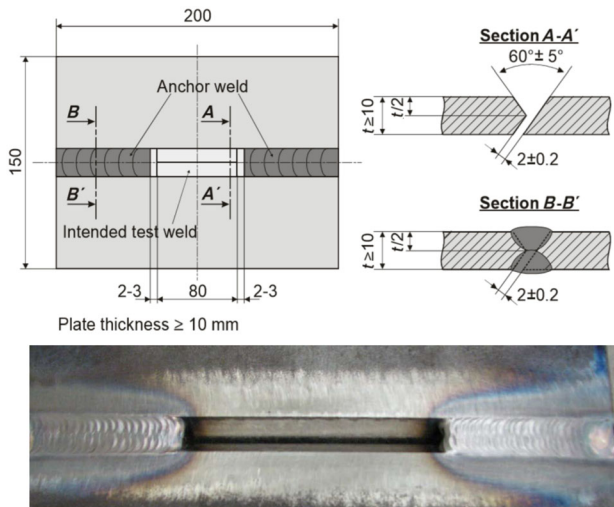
Schematic drawing and picture of crack test and joint of inclined Y-groove butt
